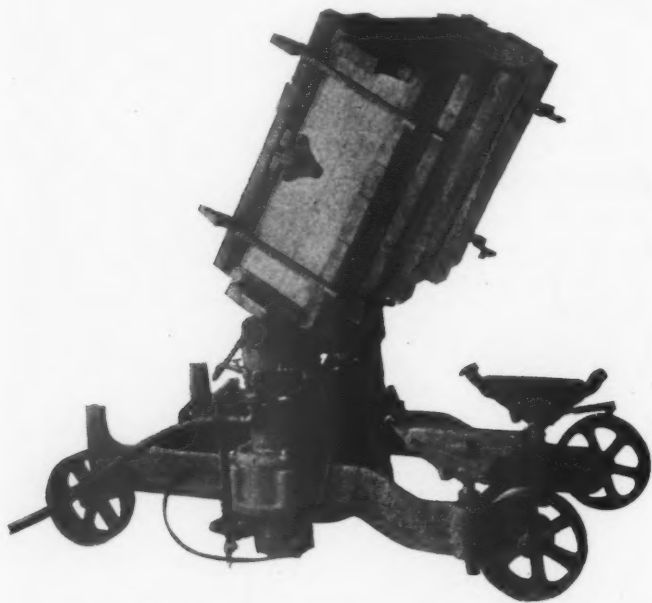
POWER TURN OVER POWER DRAFT MOLDING MACHINE.
